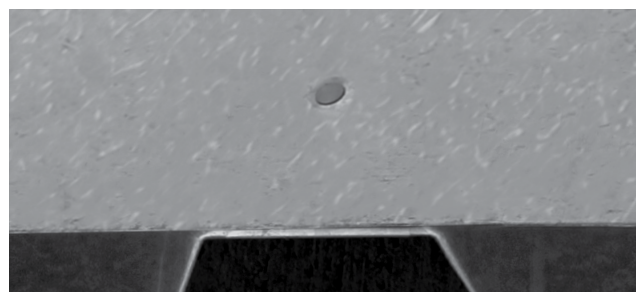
SMOOTH SERIES™ RIVET ATTACHMENT
